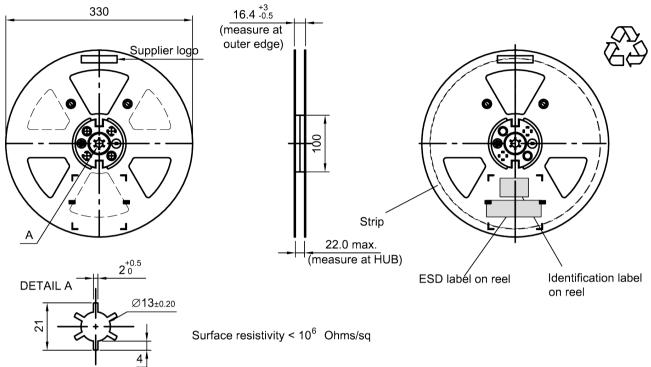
Drawing of reel (first-angle projection) with diameter of 330 mm.
